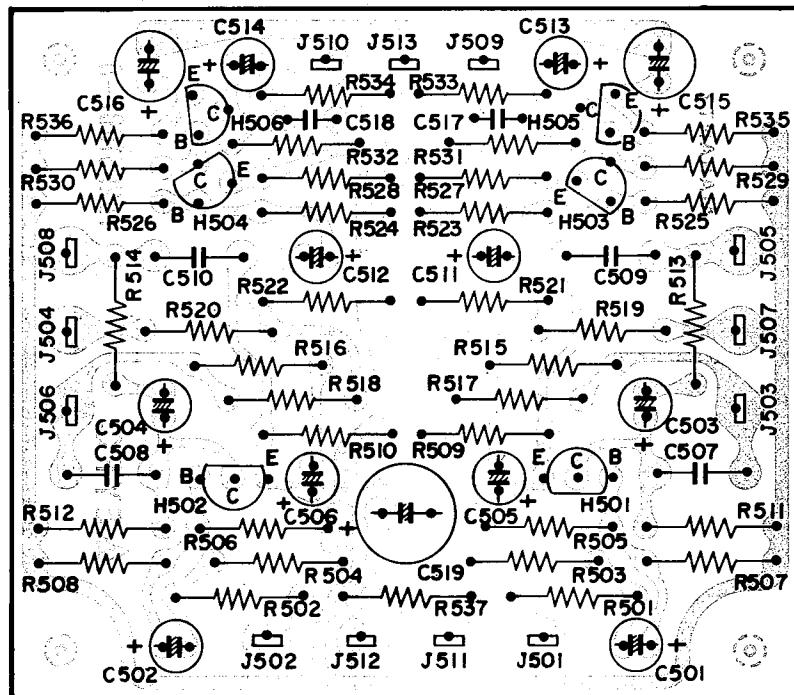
Vari-Matrix Unit Assembly P500 Component Locations
